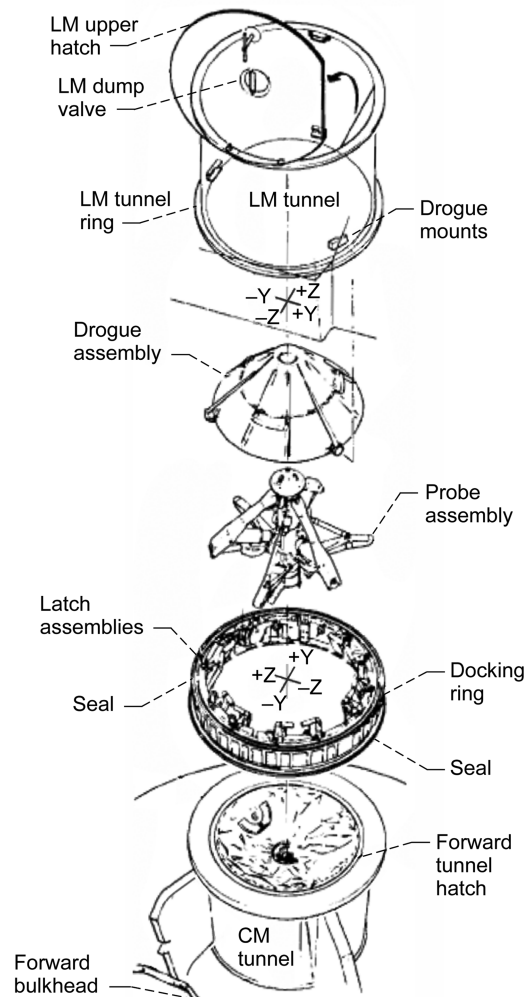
Apollo docking assembly (Fig. 9 in [20]).
